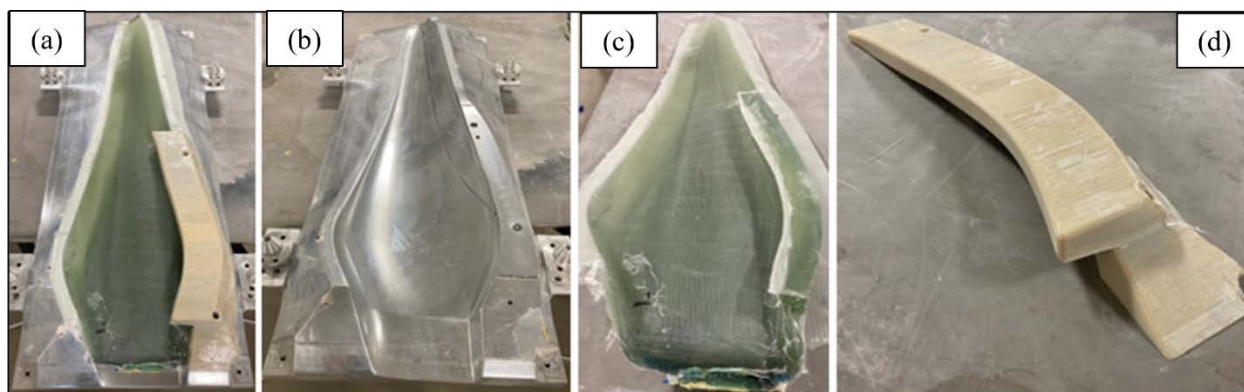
(a) The as-manufactured assembly containing (b) the primary mold, (c) the blade skin, and (d) the return flange
